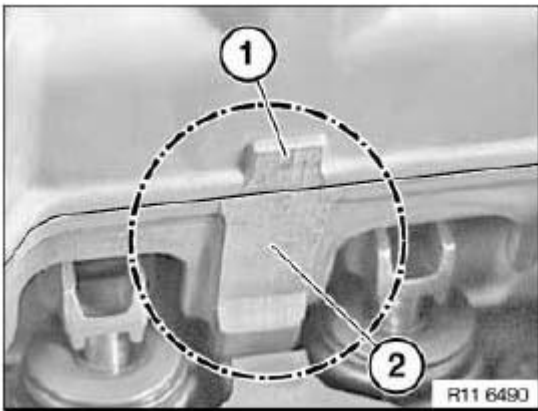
Aligning Mark Of Lower Bearing Bank And Upper Bearing Banks
